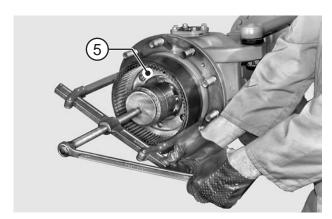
Remove the complete ring gear flange (5) by using a puller and applying counter pressure to the studs.
